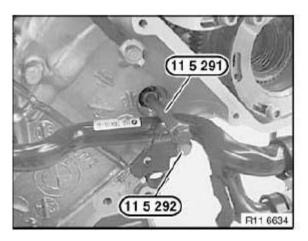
Identifying Special Tools 11 5 291 And 11 5 292 Courtesy of BMW OF NORTH AMERICA, INC.
